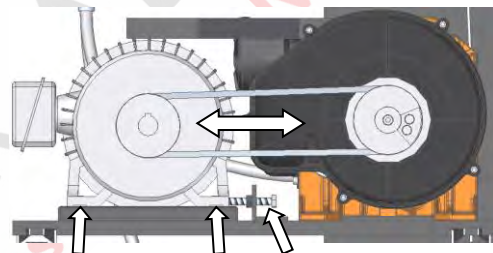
Loosen motor footstands anchor screw, adjust tightness of motor or change belt ES08 & ES11~ES15. And then, loosen the adjusting screw when finished the adjustment.
